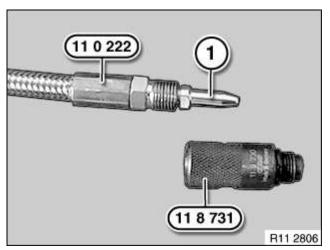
Tip, Special Tools (11 0 222) And (11 8 731) Courtesy of BMW OF NORTH AMERICA, INC.
